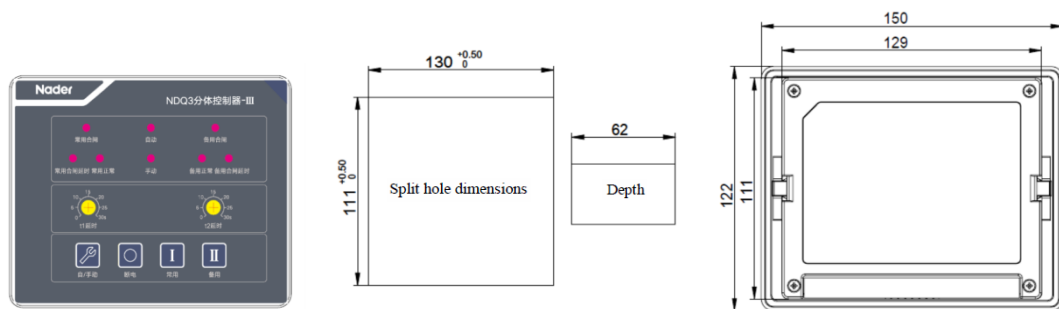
Shape and opening size of N-type/blank II-stage split controller
